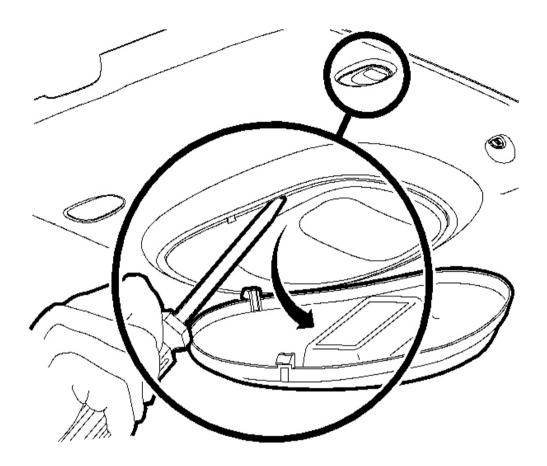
View Of Cargo Lamp Assembly Courtesy of GENERAL MOTORS CORP.
